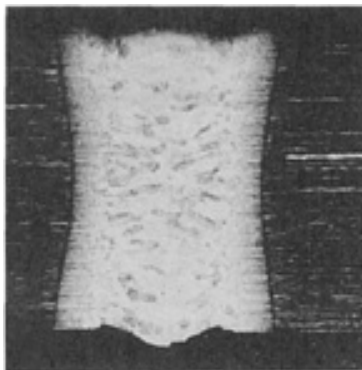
MACROGRAPH SHOWING COLUMNAR BETA GRAINS IN A TI-6AL-4V LASER-BEAM WELD. 13 \times . COURTESY OF THE WELDING INSTITUTE
